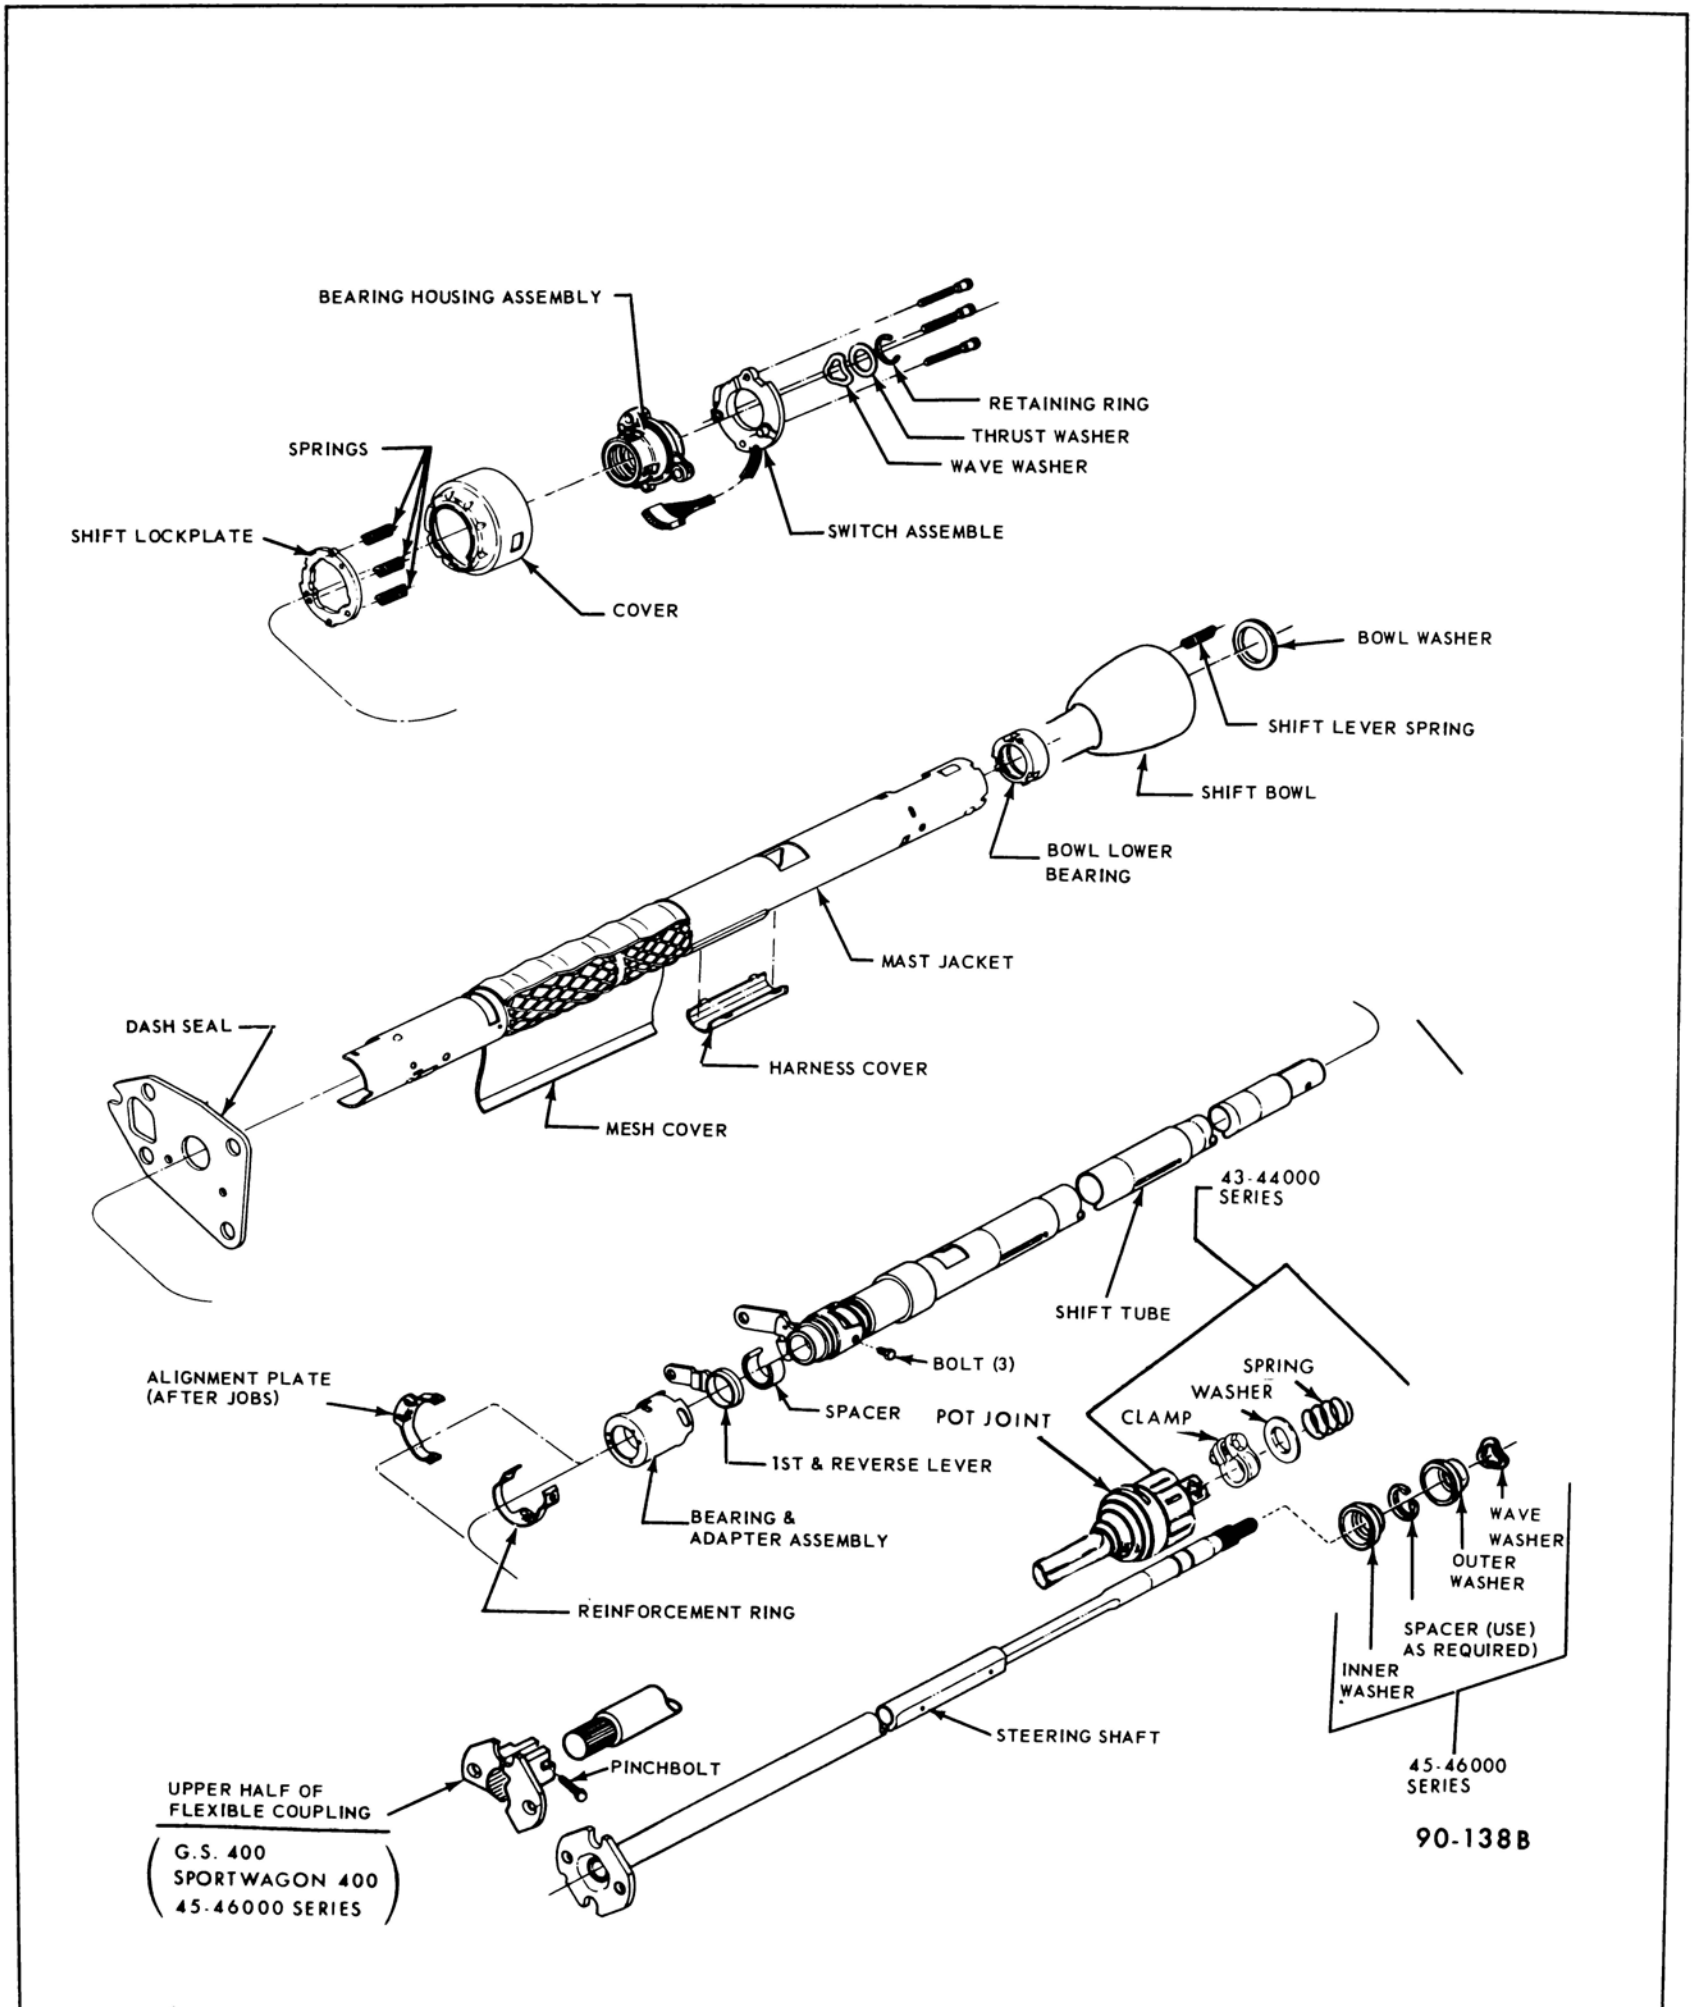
Standard (Non-tilt) Steering Column Assembly
